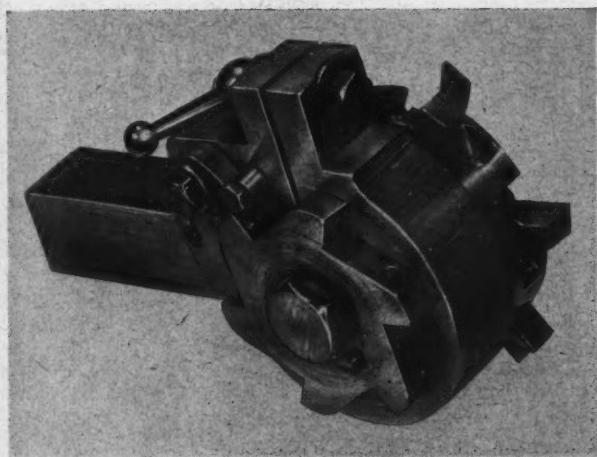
Ormiston 6-station indexing tool-holder for a lathe
